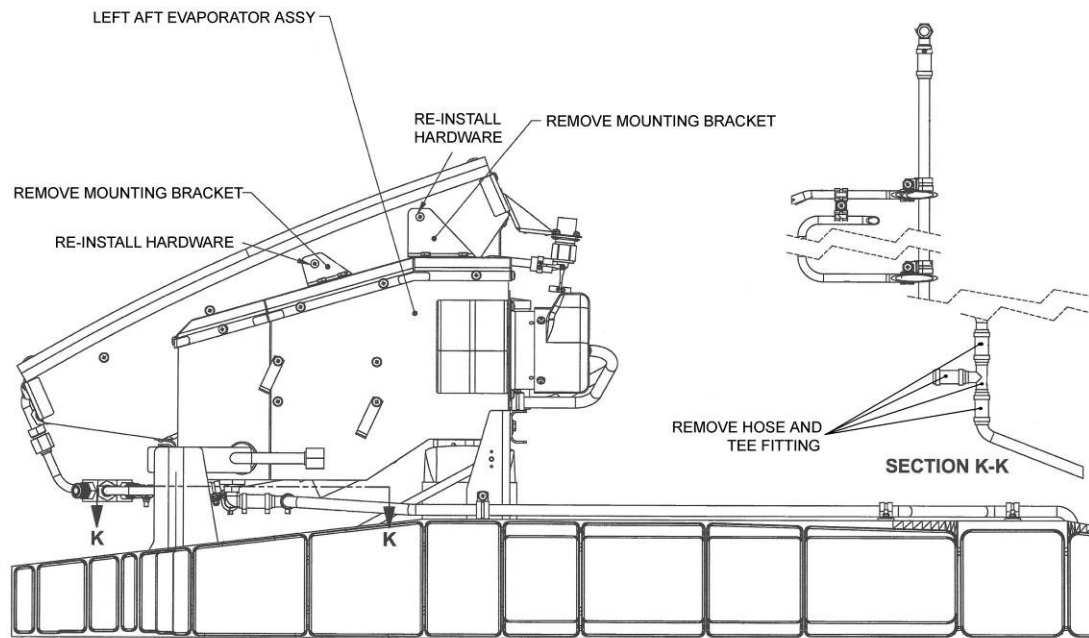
View of Left Aft Evaporator Assy Looking Inboard from LH Side
